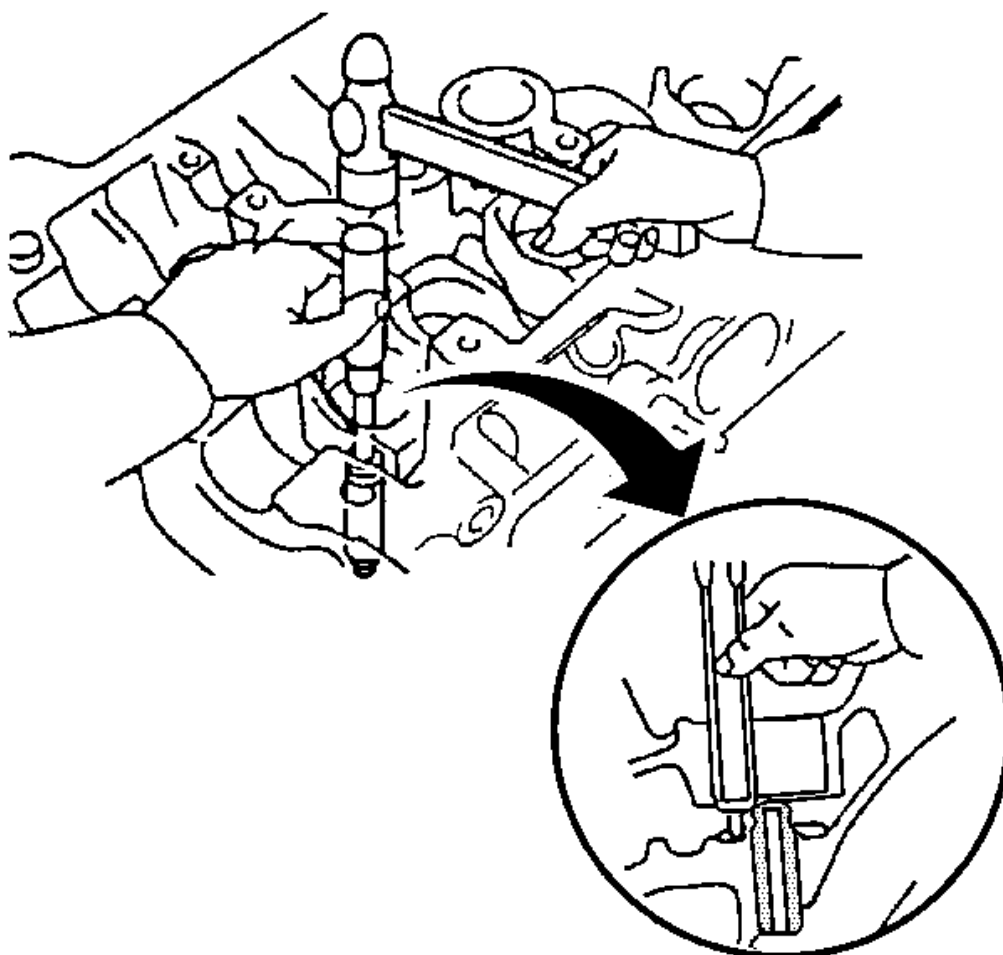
Installing New Valve Guide Into Cylinder Head From Camshaft Side
